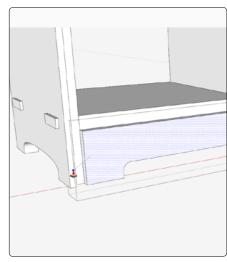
Draw a rectangle in the lower back opening and make it a component.
